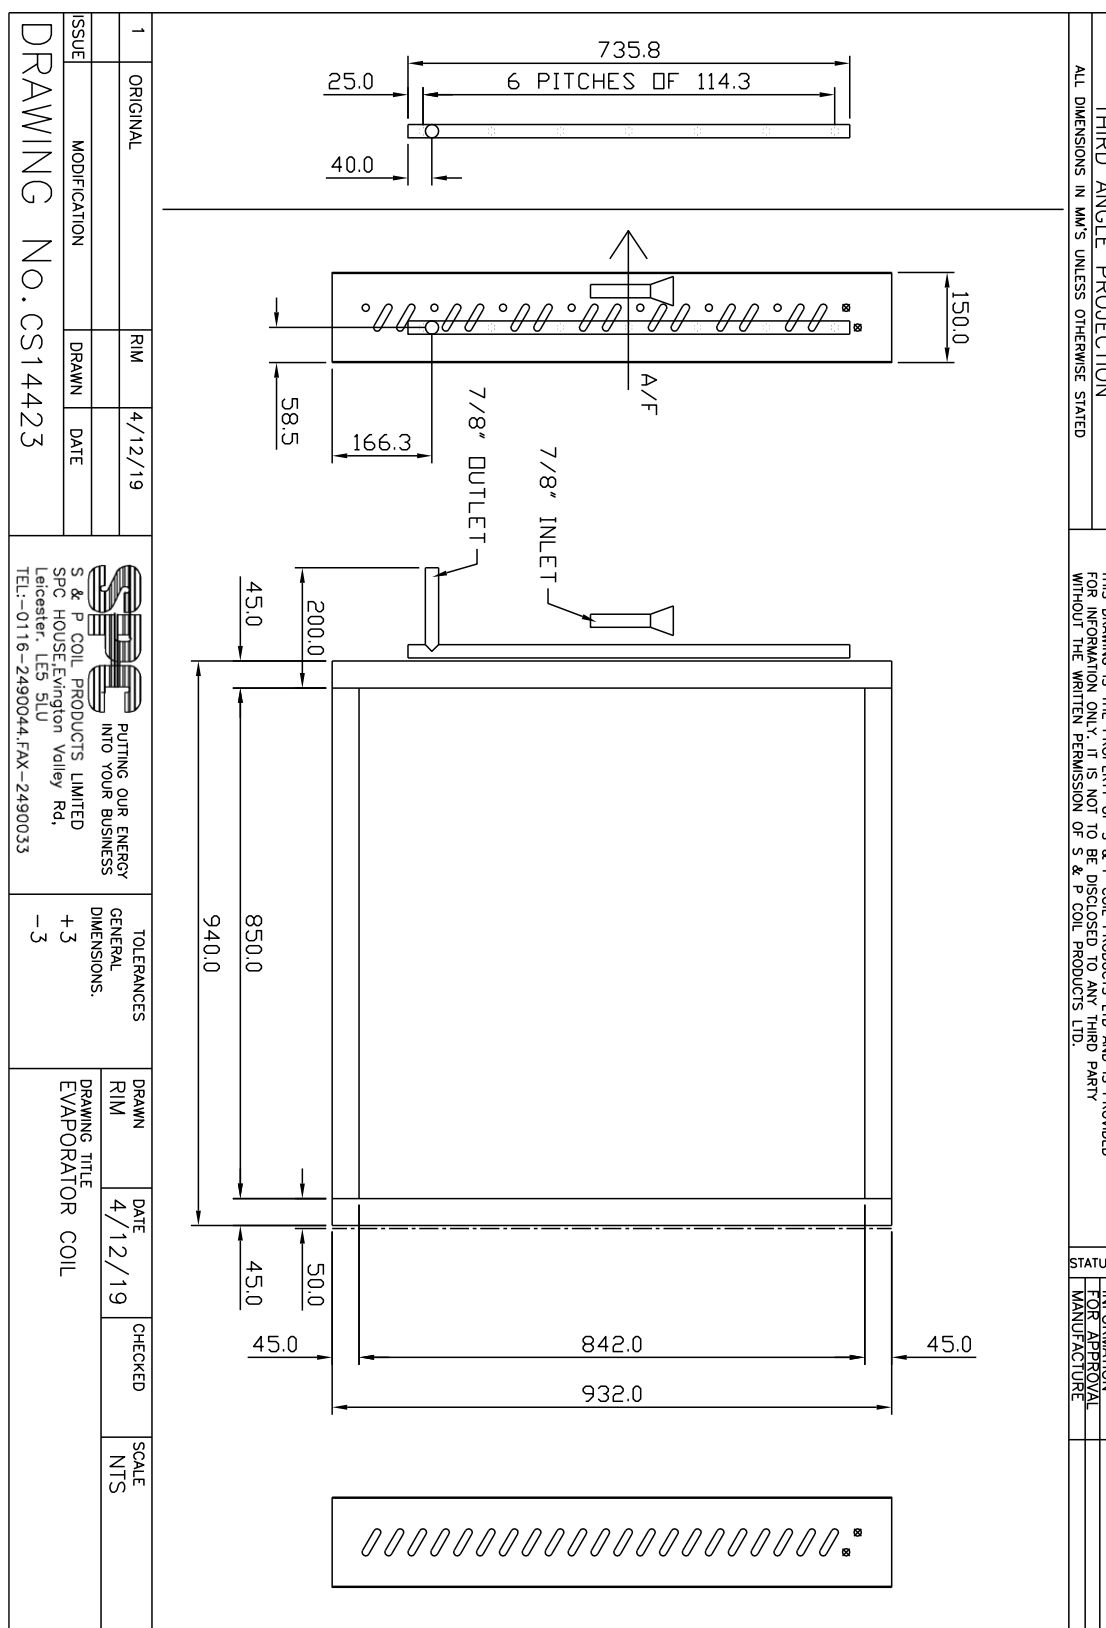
Technical drawing of the fin coil heat exchanger used as an evaporator in the test rig.
